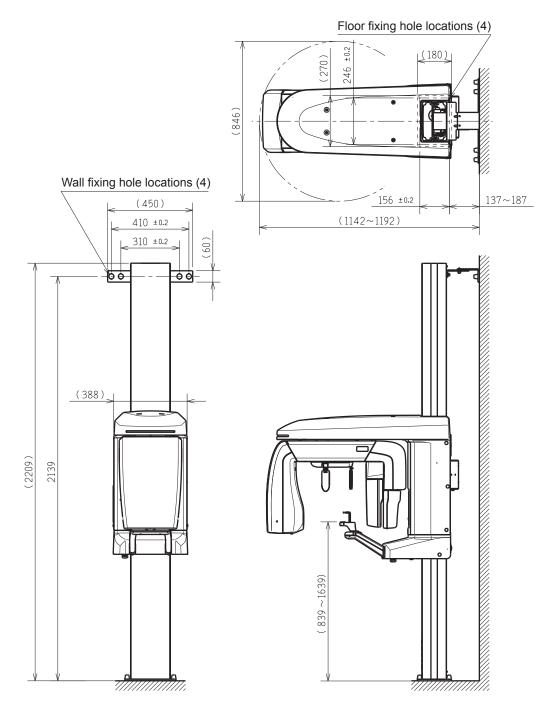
Fixing hole location measurements (Standing position wall-mount: 3D type)
